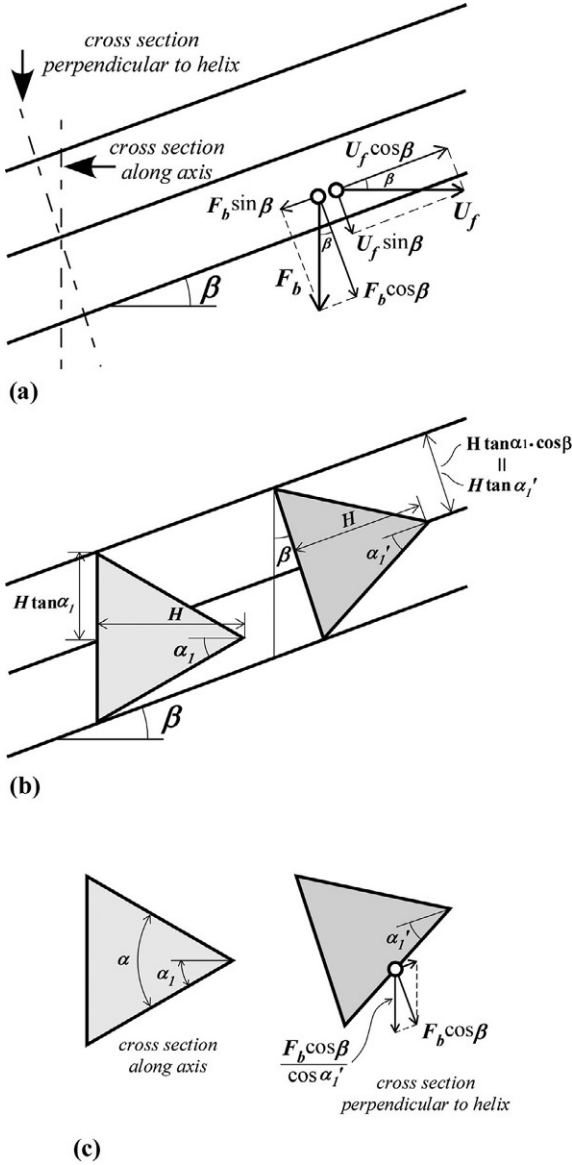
Equilibrium of forces on thread surface in triangular screw threads. (A) Equilibrium of forces on thread surface, (B) relationship between cross sections along axis and perpendicular to helix, and (C) equilibrium of forces on cross section perpendicular to helix.
